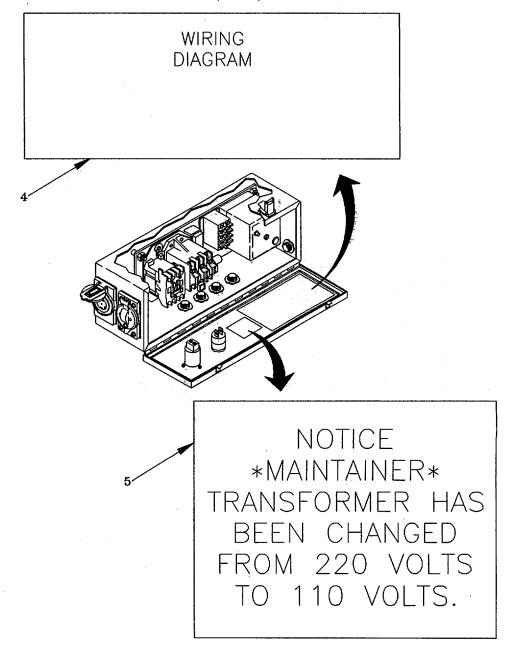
Decals and Instruction Plates (Sheet 2 of 5)
